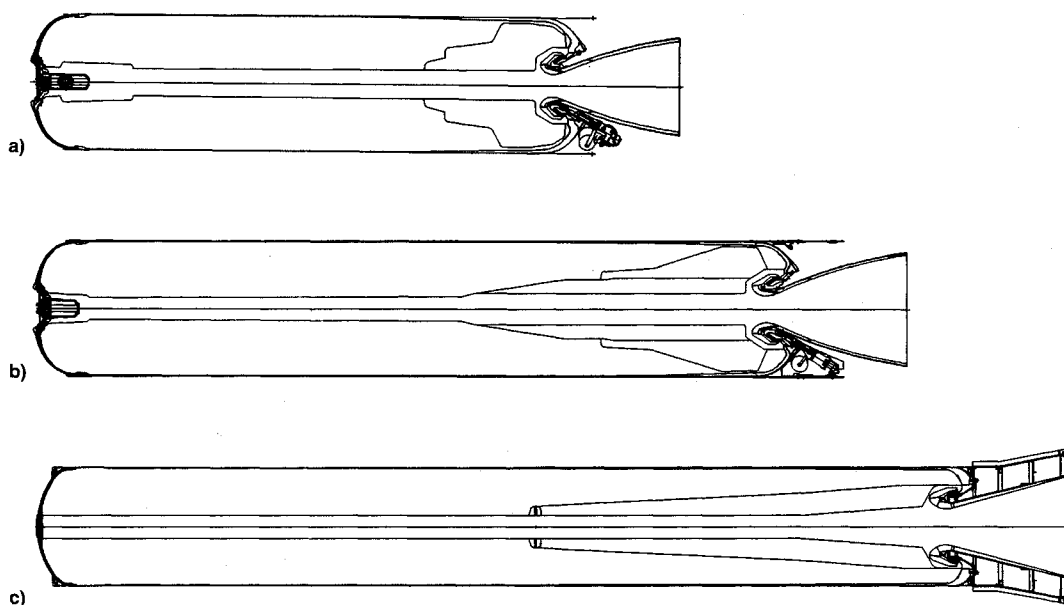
Solid boosters with long tapered aft-fins: a) SICBM short motor, b) SICBM long motor, and c) Castor IVB.
